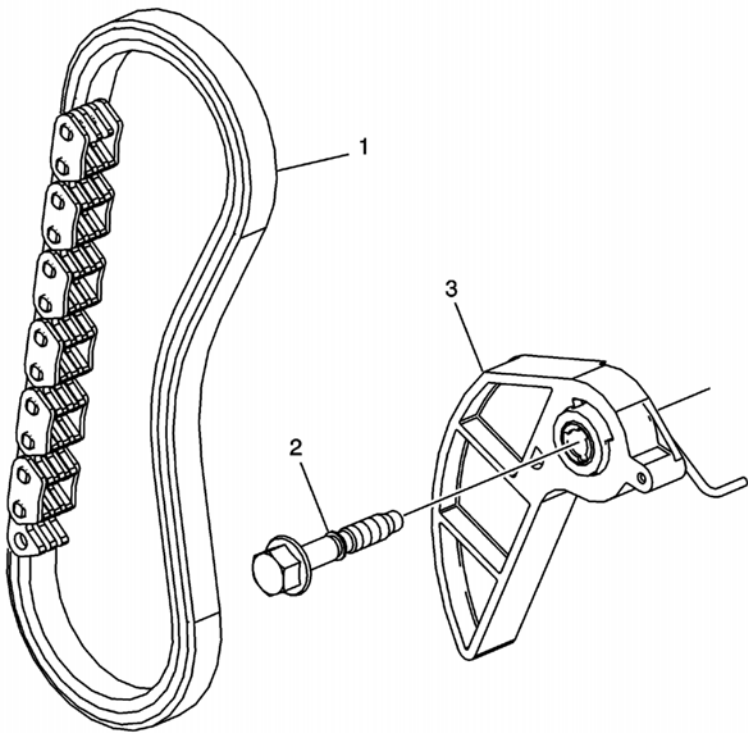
Oil Pump Drive Chain Tensioner and Oil Pump Drive Chain Cleaning and Inspection
